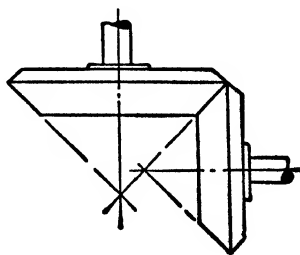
Arrangement for Hypoid Bevel Gears.
